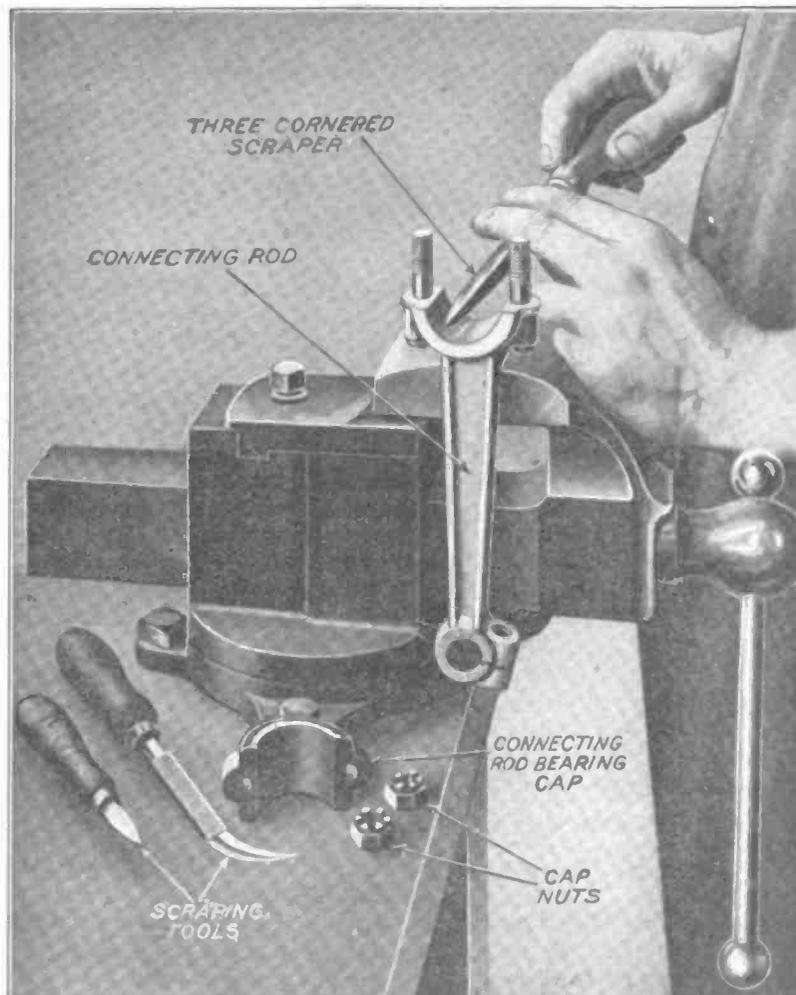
Illustrating method of scraping in connecting rod bearings and tools used in this process
